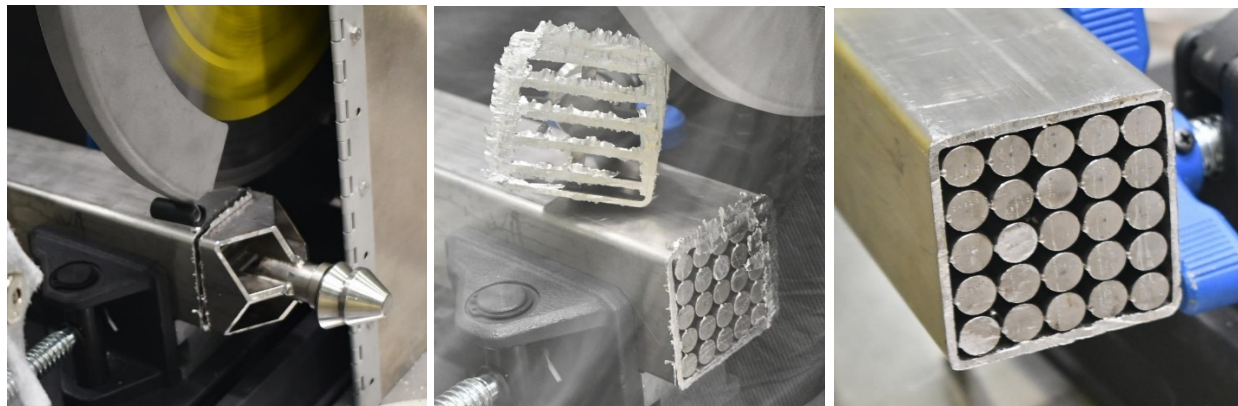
Cutting through the top grid plate of Fermi-1 radial blanket assembly (left), separated assembly lifting fixture (center), and filed end of square duct (right).
